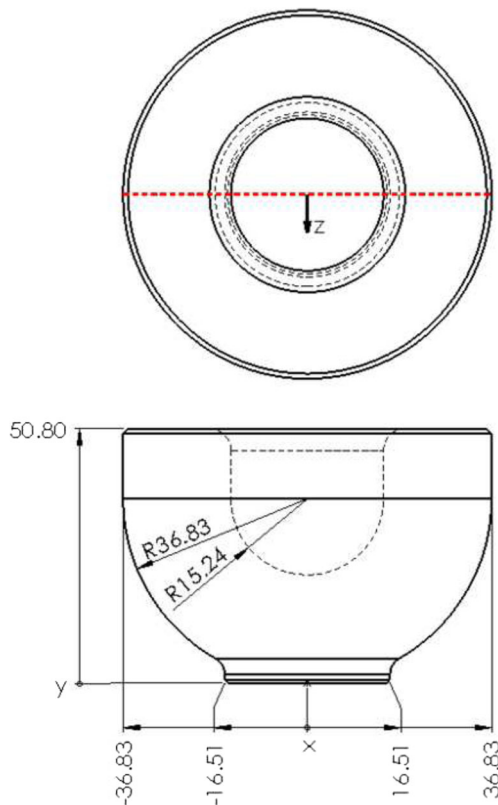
Stainless steel forging dimensions and measurement location (dimensions in mm)
